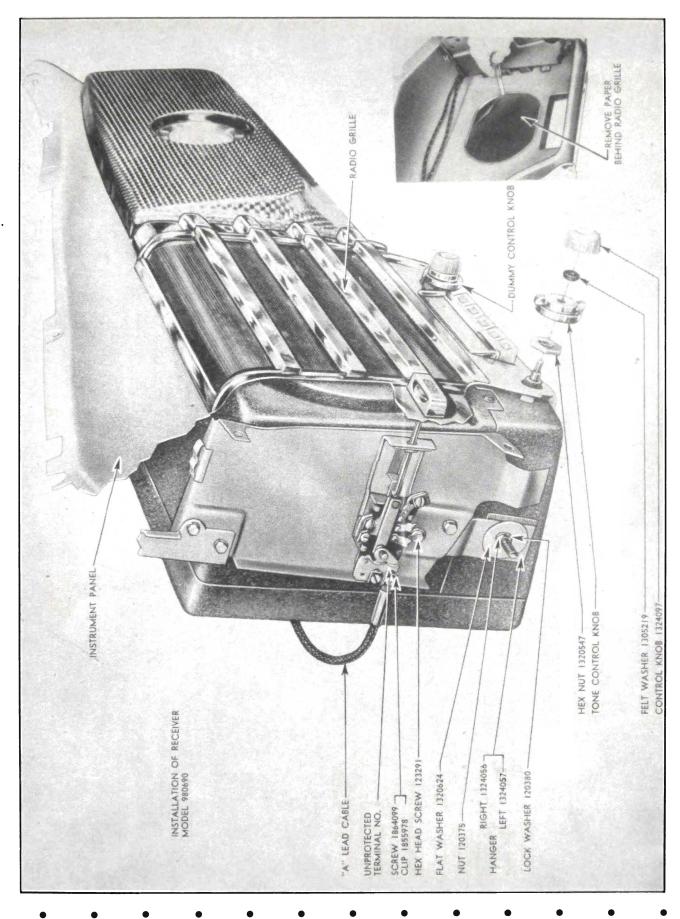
Proper Method of Attaching Radio to Instrument Panel—Series 40-60-90
